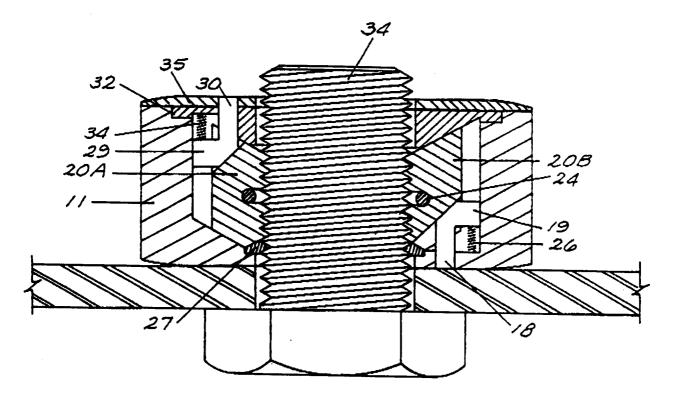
is a sectional view, in longitudinal central section with a bolt or threaded shaft or spindle inserted from one side of the nut.
